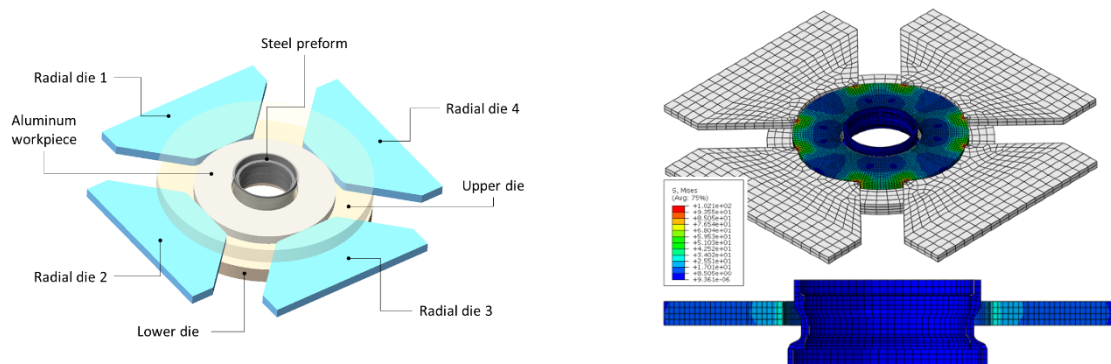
Schematic representation of the radial forging process; Fig. 8. Radial forging initial state, isometric and cross-section views.
